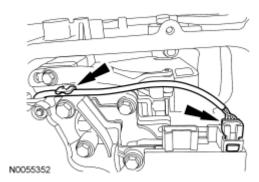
Locating OSS Sensor Wiring Harness & Electrical Connector Courtesy of FORD MOTOR CO.
